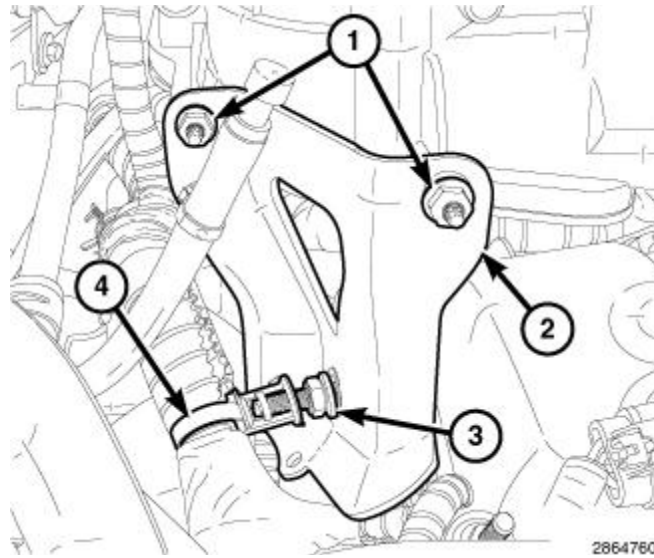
Upper Intake Manifold Support Bracket, Stud & Fasteners
